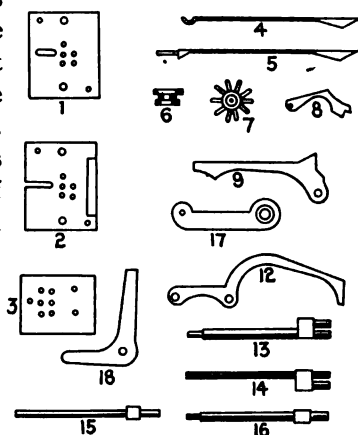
Parts of the mallet perforator. 1, Front puncher plate; 2, back puncher plate; 3, back guide to punchers; 4, back spring acting on star wheel click lever; 5, vertical spring on which guide roller is pivoted; 6, guide roller; 7, star wheel; 8, star wheel click; 9, star wheel click lever; 12, lever regulating play of star wheel click lever; 13, center punch (for dot, dash and space); 14, top punch (for dot and dash); 15, bottom punch (2, 1 for dot 1 for dash); 16, center punch (for dash); 17, socket lever; 18, adjusting lever.
